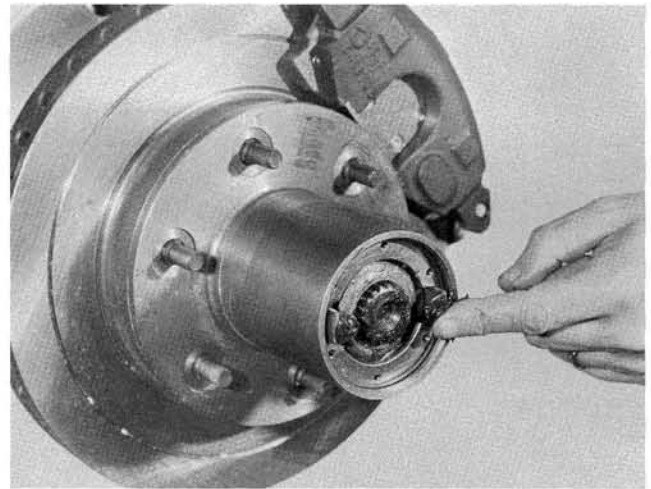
Assemble cam body ring (8 and 9) into clutch retainer and assemble into hub. (Continued on next page)
